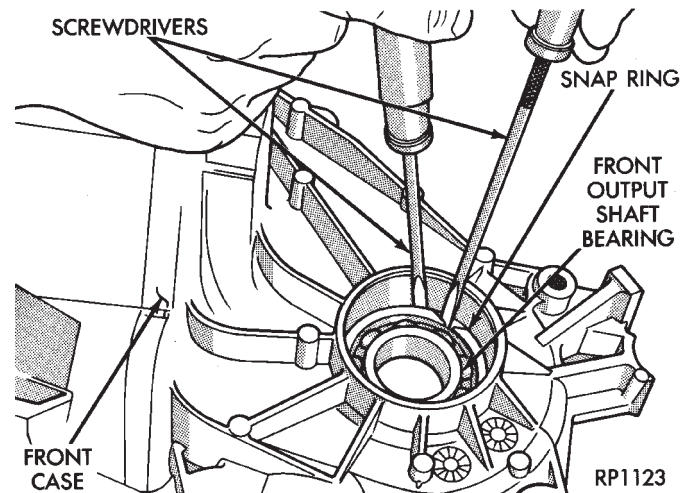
Removing/Installing Front Output Shaft Bearing Snap Ring
